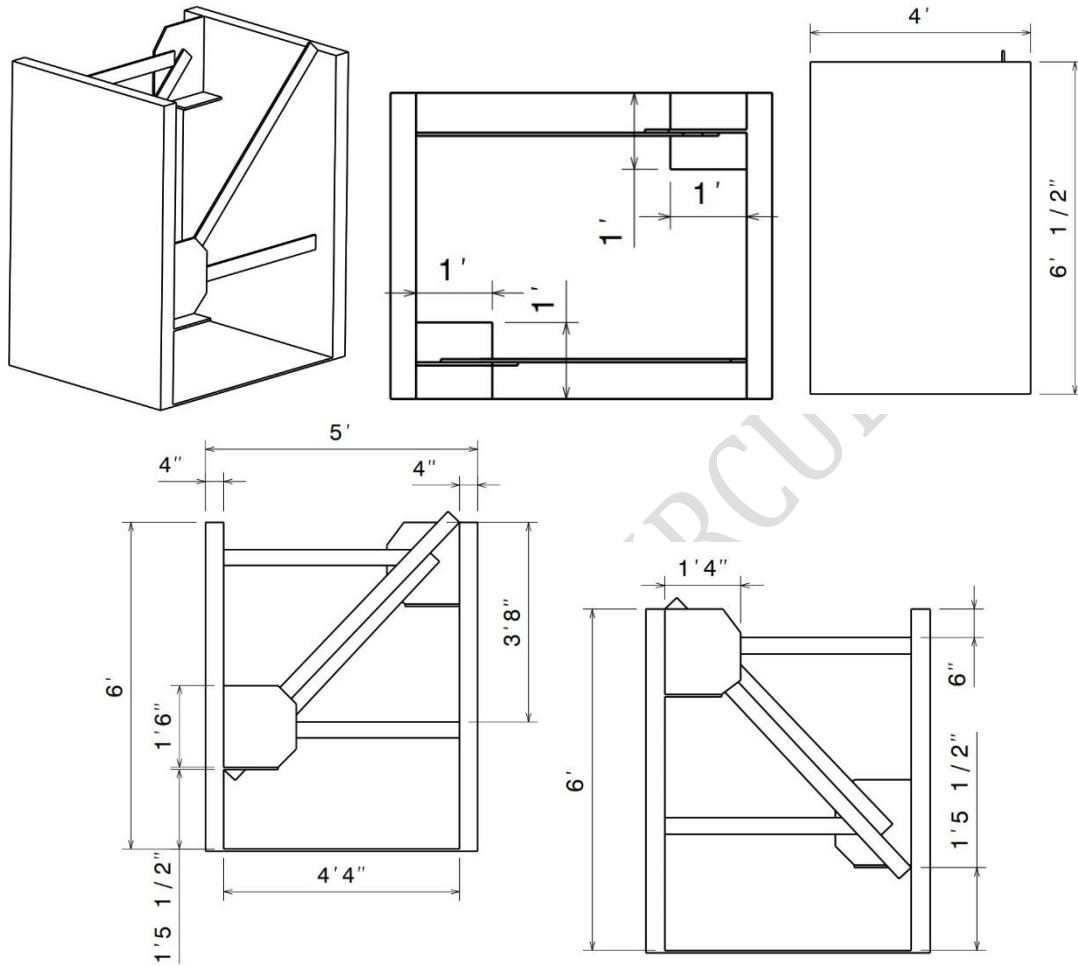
Isometric view, top view, side view, front view, and back view of Component 5
